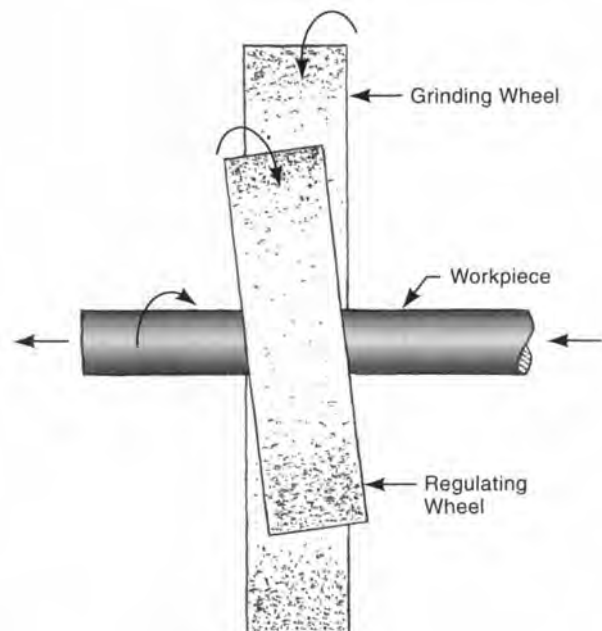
C1b1 In through-feed centerless grinding, the inclination of the regulating wheel induces a sideways thrust on the workpiece.
